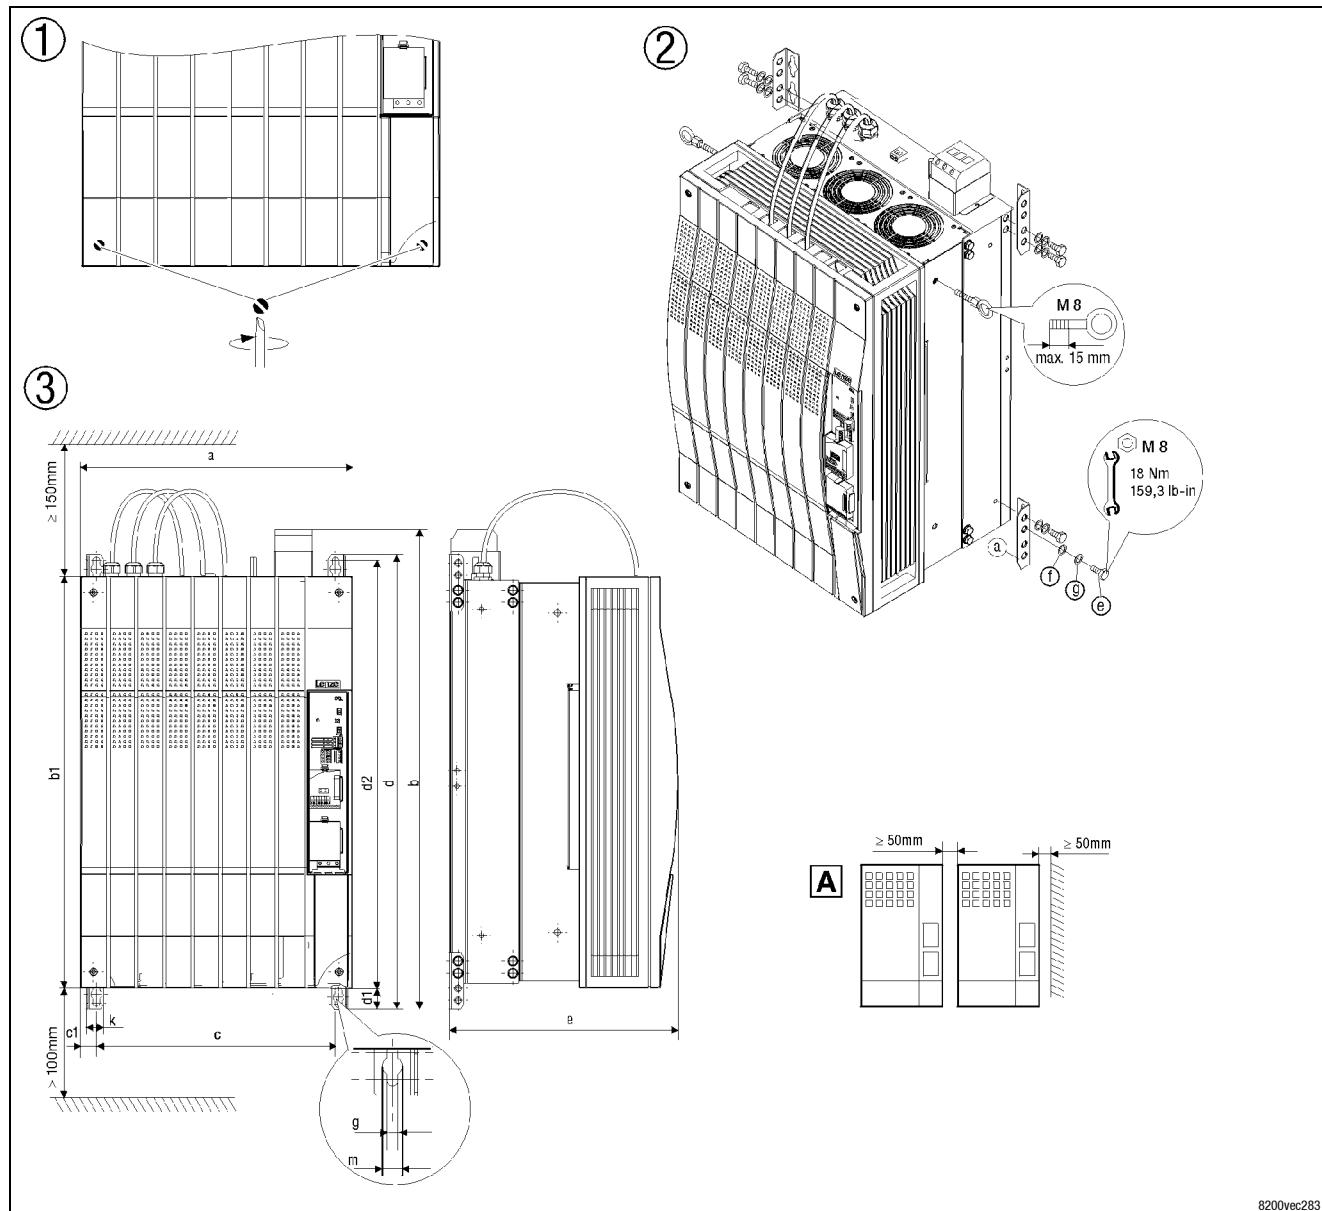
Standard mounting with footprint mains filter 75 ... 90 kW
